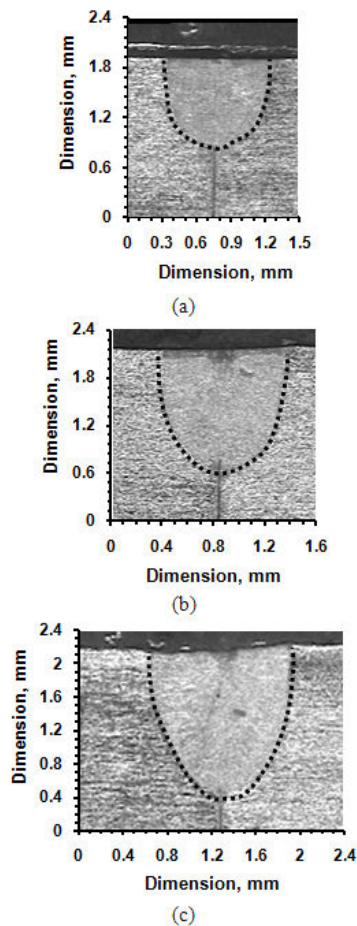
Weld bead geometries for welding speed of 800mm/min, beam angle of 85° and beam power of (a) 1000W, (b) 1400W and (c) 1800W – Partial Penetration
